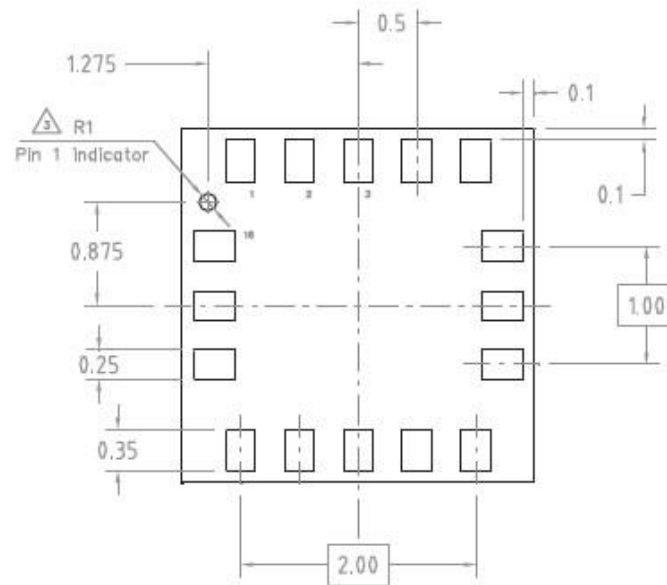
LGA 3x3x0.86 16L package outline and dimensions.
